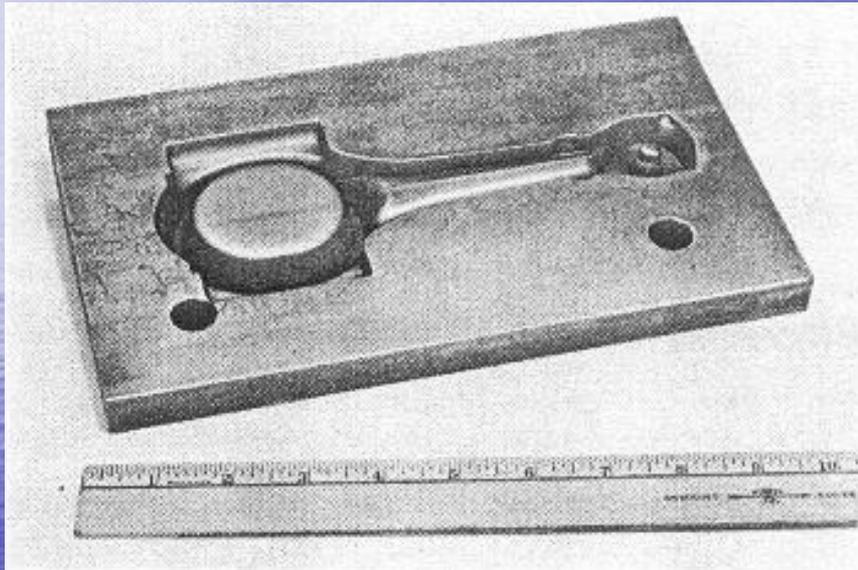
Die sink impression for connecting rod die machined from a solid blank in 18 min. (*Courtesy, Anocut Engineering Company*)
